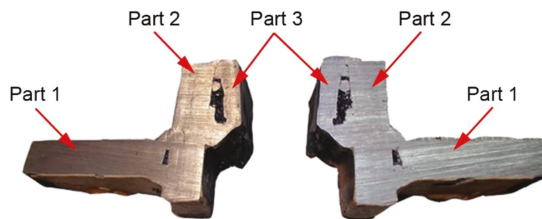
The cross-cut surface. Weld seam defects are shown (handy-size bulk carrier 30210 DWT). Macroscopic examination.
